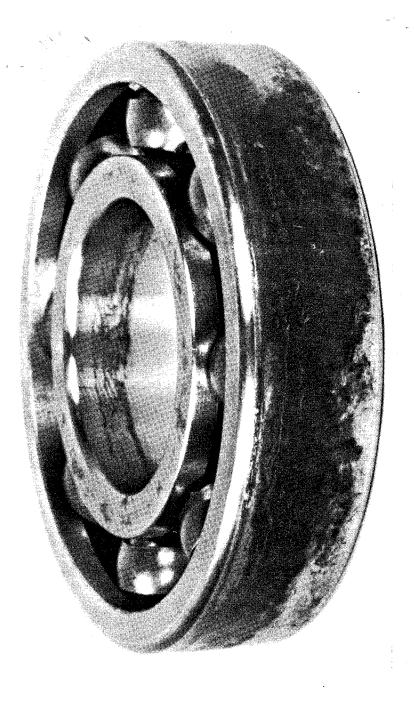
Fretting Corrosion On Bearing Outer Ring
